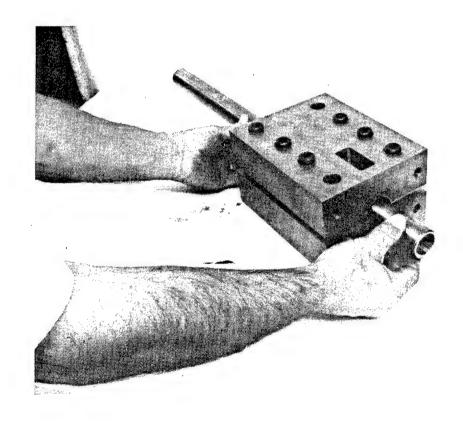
Installing DWAl $20^{\$}$ and Steel Track Pin into Pin-end Crimp-forming Tool
